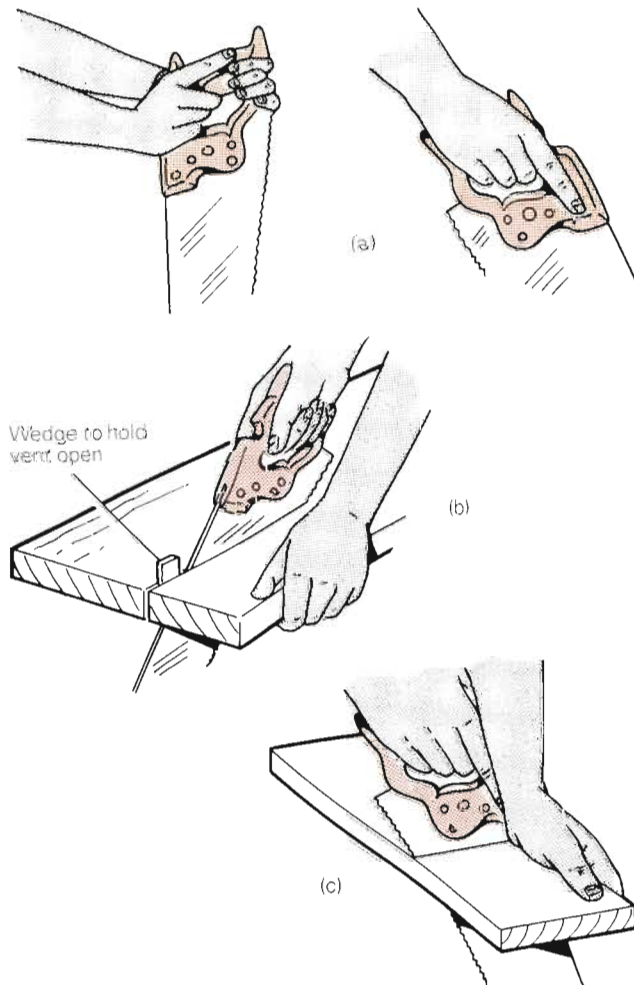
Sawing: (a) holding the saw, (b) ripping, (c) cross cutting.
